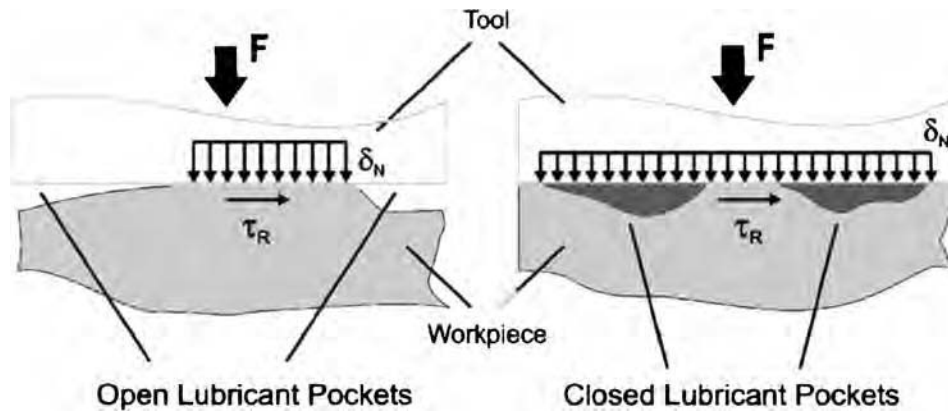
Schematic representation of the open and closed lubricant pockets formed at the tool-workpiece interface during the double-cup extrusion test. Source: Ref 142
